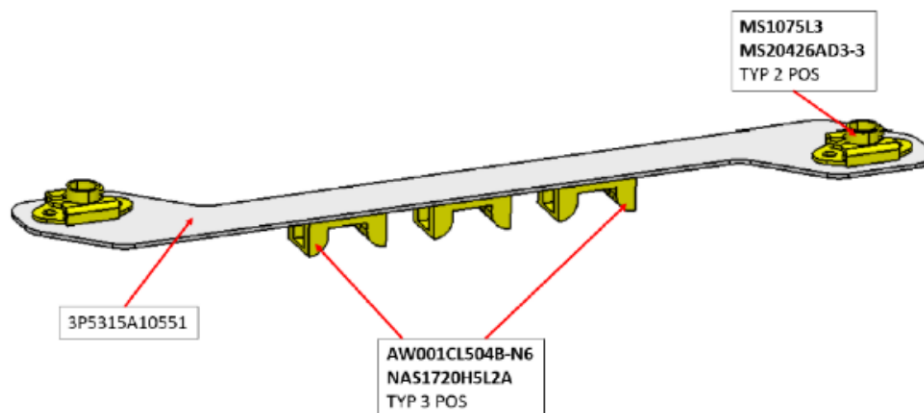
The 3D figure included with the updated strip assembly manufacturing card
